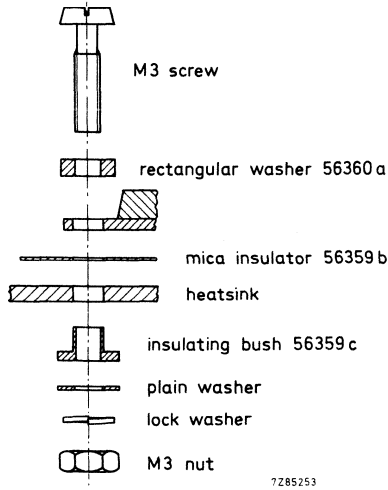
Insulated screw mounting with rectangular washer. Known as a "bottom mounting".
